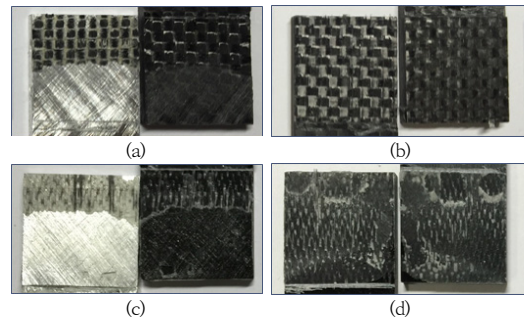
Fractured surface of mechanically abraded specimen of (a) Al-CFRP, (b) CFRP-CFRP, (c) Al-GFRP and (d) GFRP-GFRP
